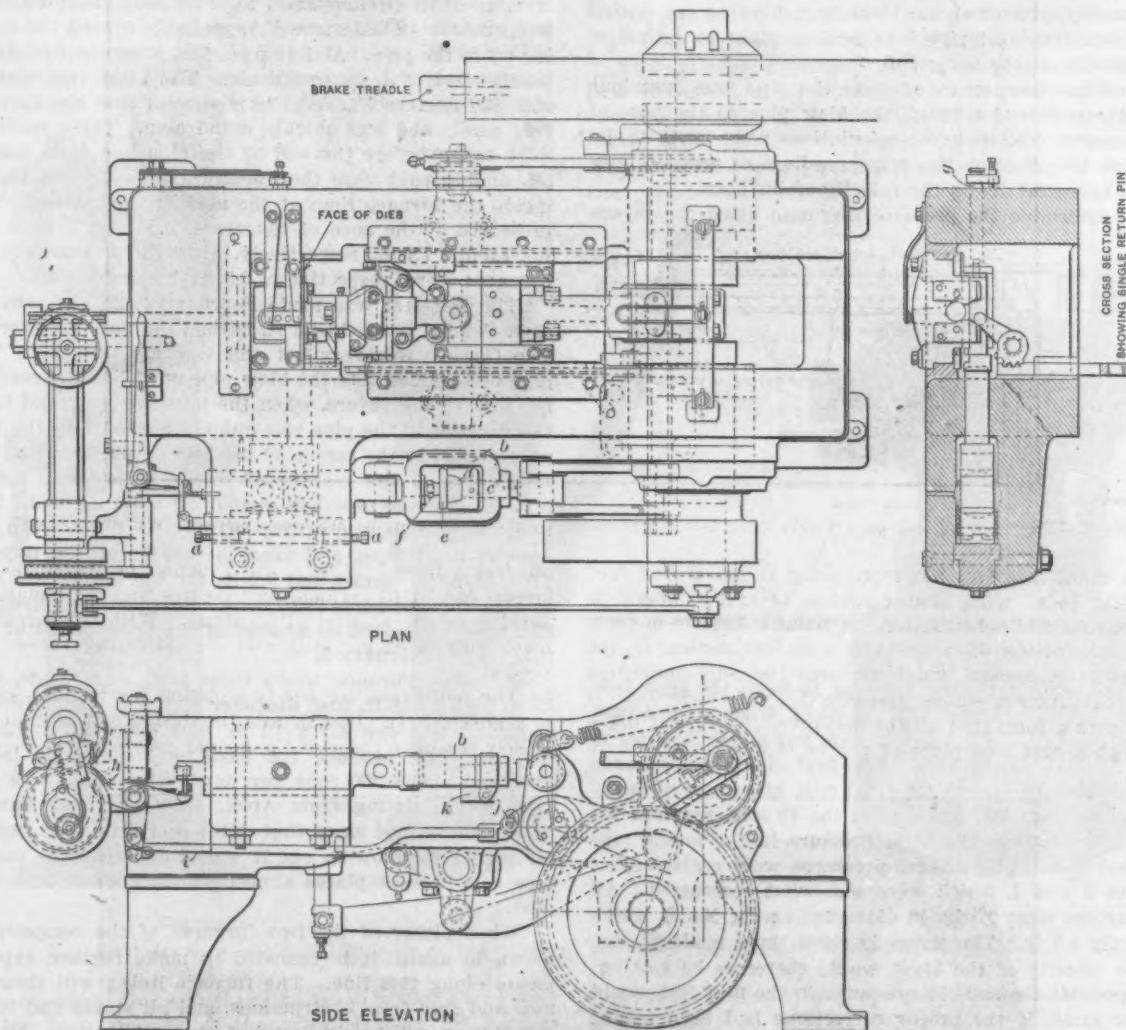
Plan, Elevation and Cross Vertical Section of the No. 4 Header.
